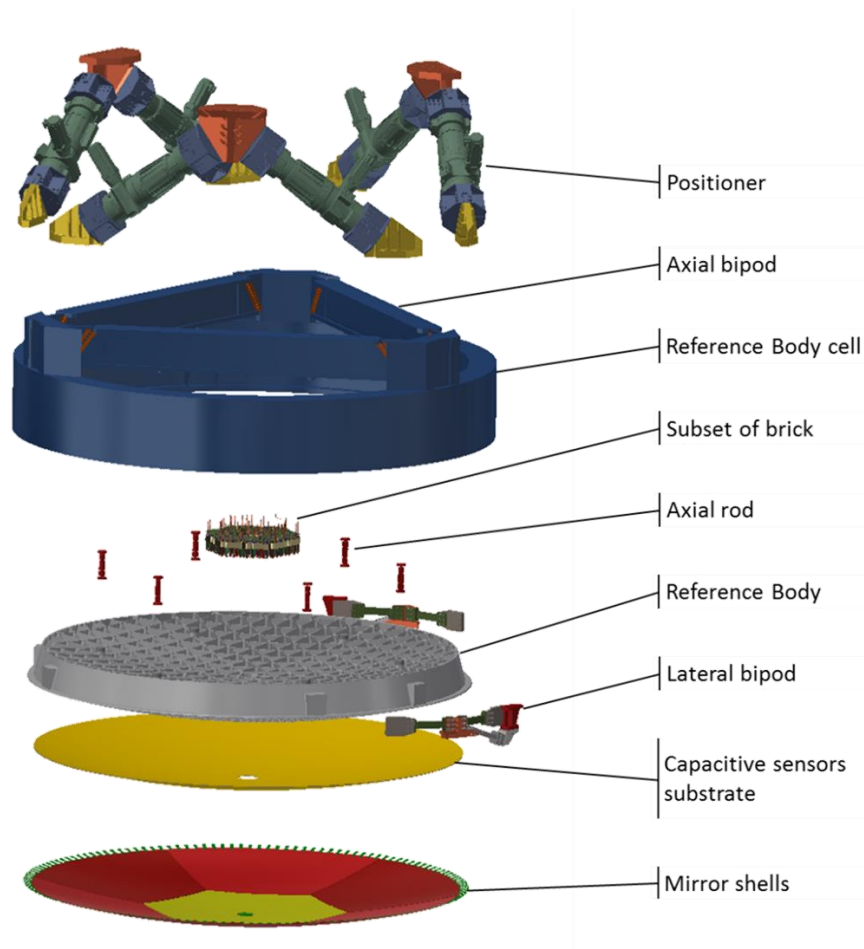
Exploded view of the Adaptive Secondary unit.
